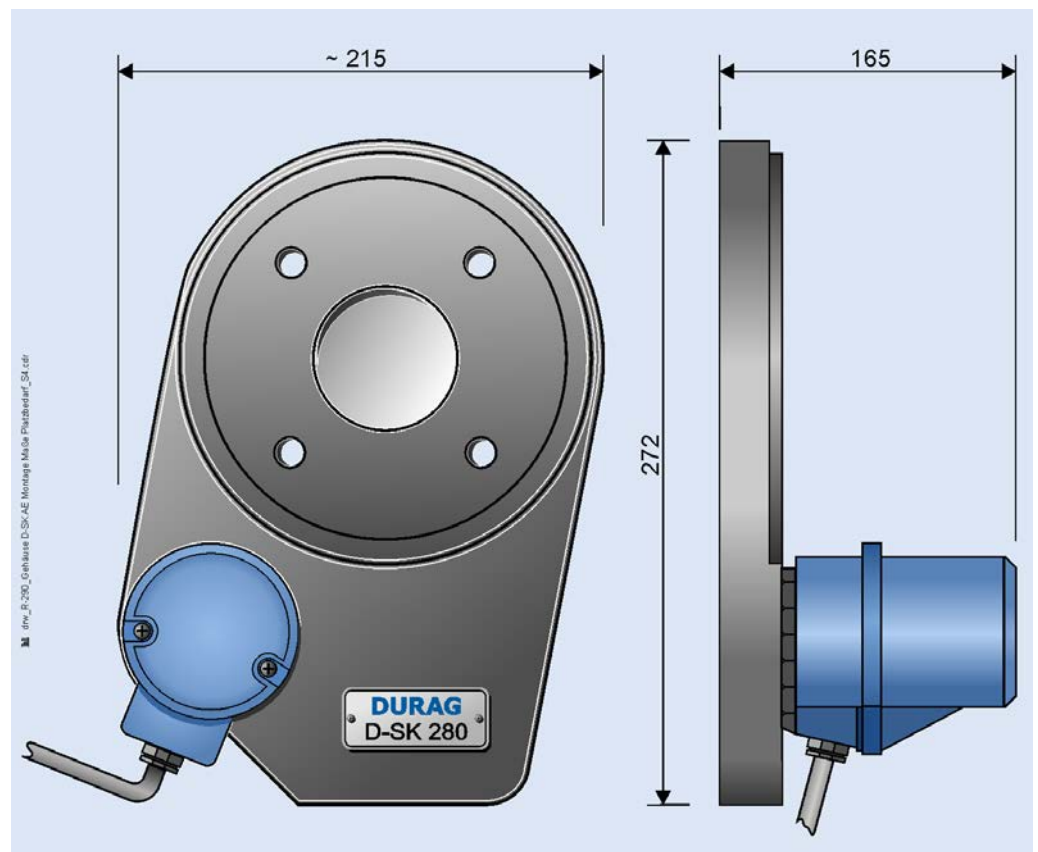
Dimensional diagram housing D-SK 280 MA *D₁ diameter 150 mm
